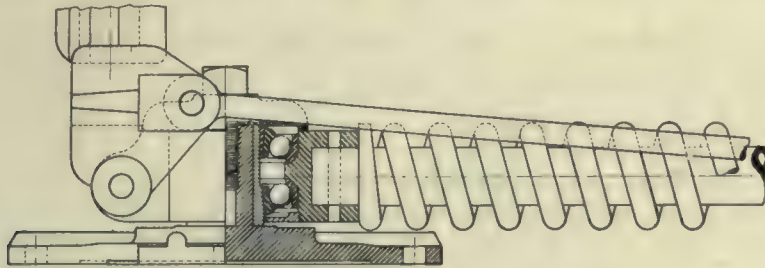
Double Ball-bearing Adapted to Trolley Bases.
